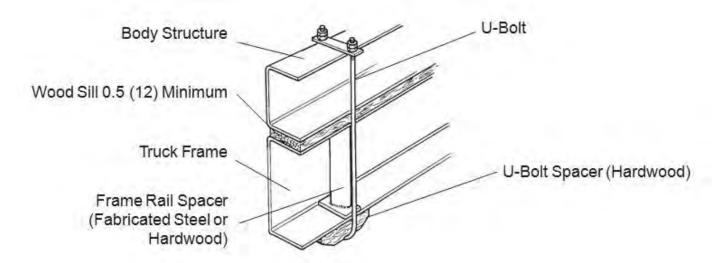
Acceptable U-Bolt Mounting with Wood and Fabricated Spacers
